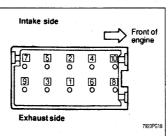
Cylinder head bolt torque sequence—1.6L and 2.0L DOHC engines
